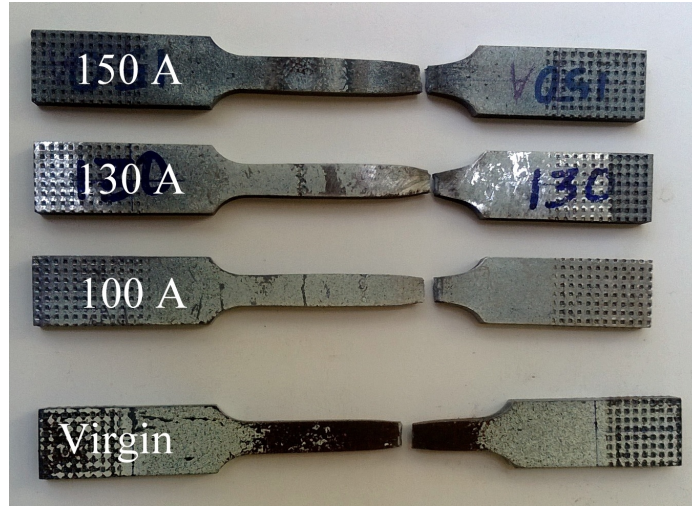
Fractured specimens after tensile testing. Current rating used for welding is mentioned on the samples.
